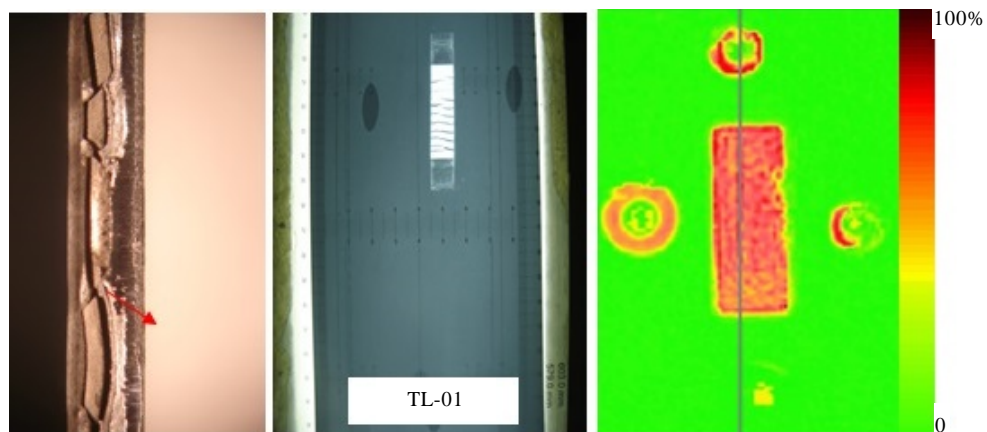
Illustration of TL-01 assembly: left; Metallographic image: lateral section of the fuel plate, showing multiple fractures, center; X-ray of the TL-01 set: frontal view of the multiple fractures and right; ultrasound C-scan image, red areas show metallic adhesion and yellow areas the lack thereof.
